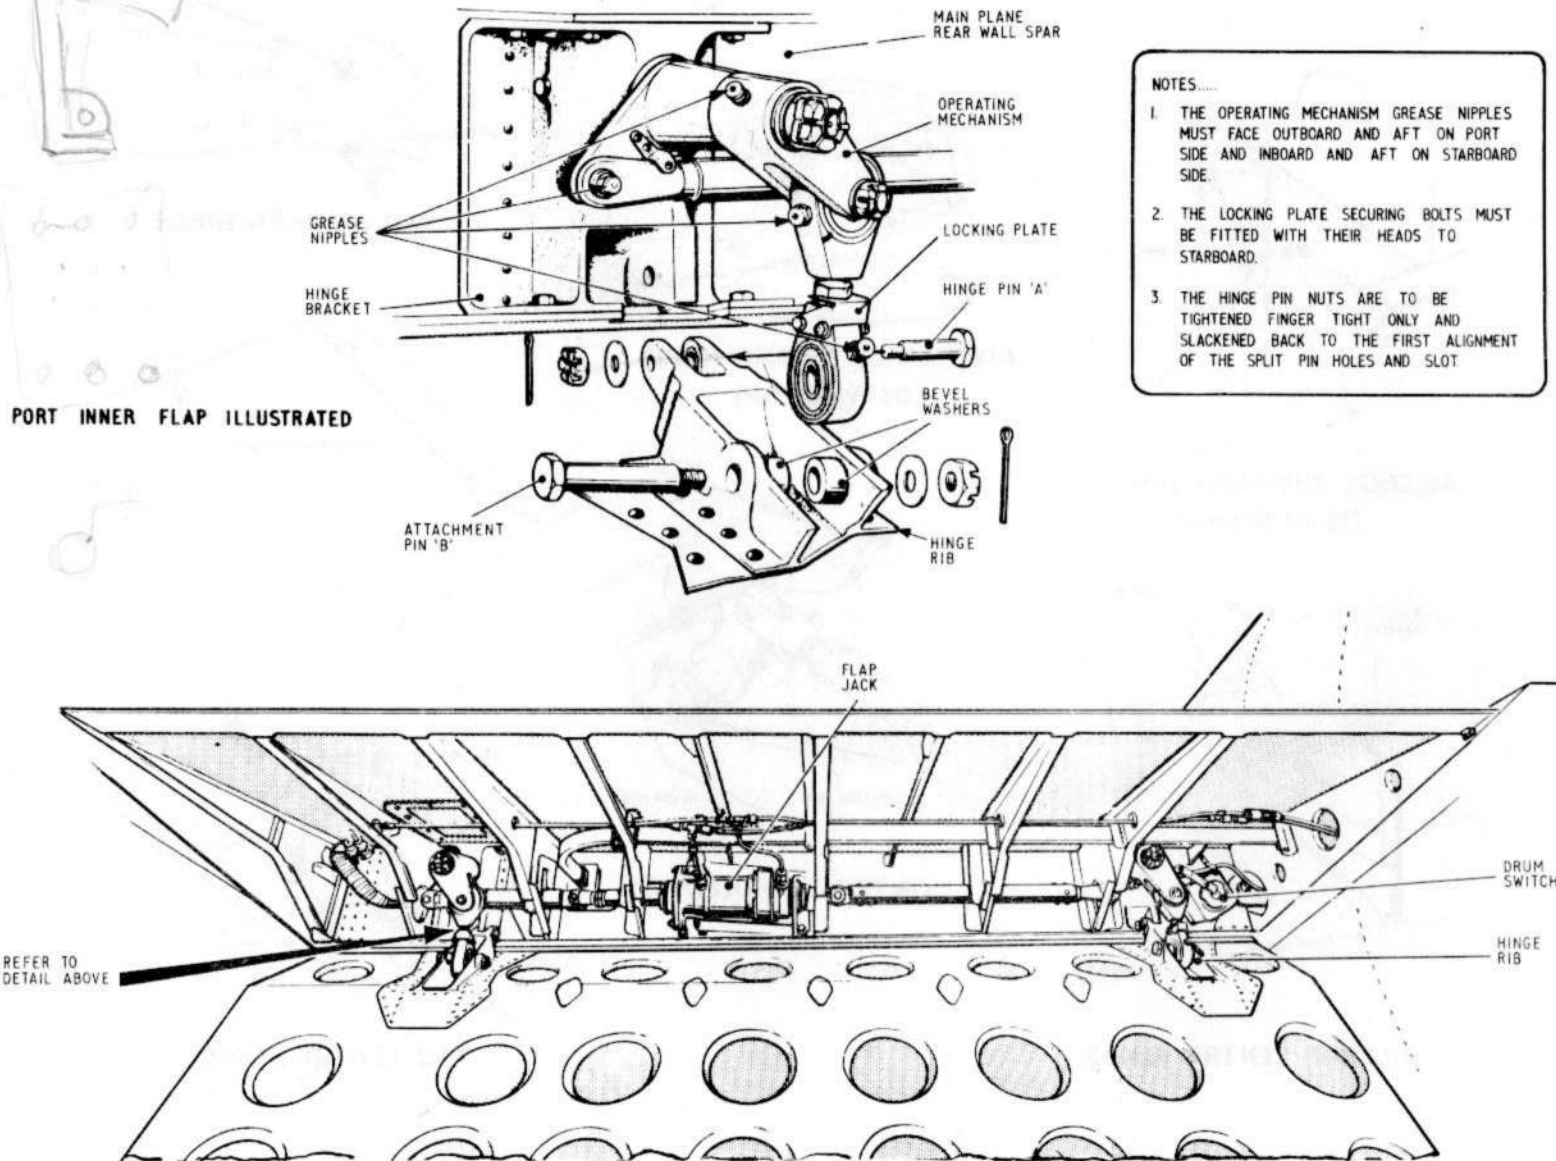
FLAP-REMOVAL AND ASSEMBLY.
